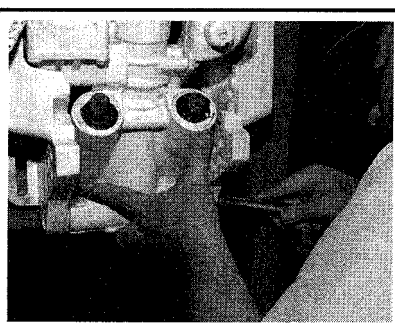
then remove lower pin, while supporting the trim/tilt assembly
